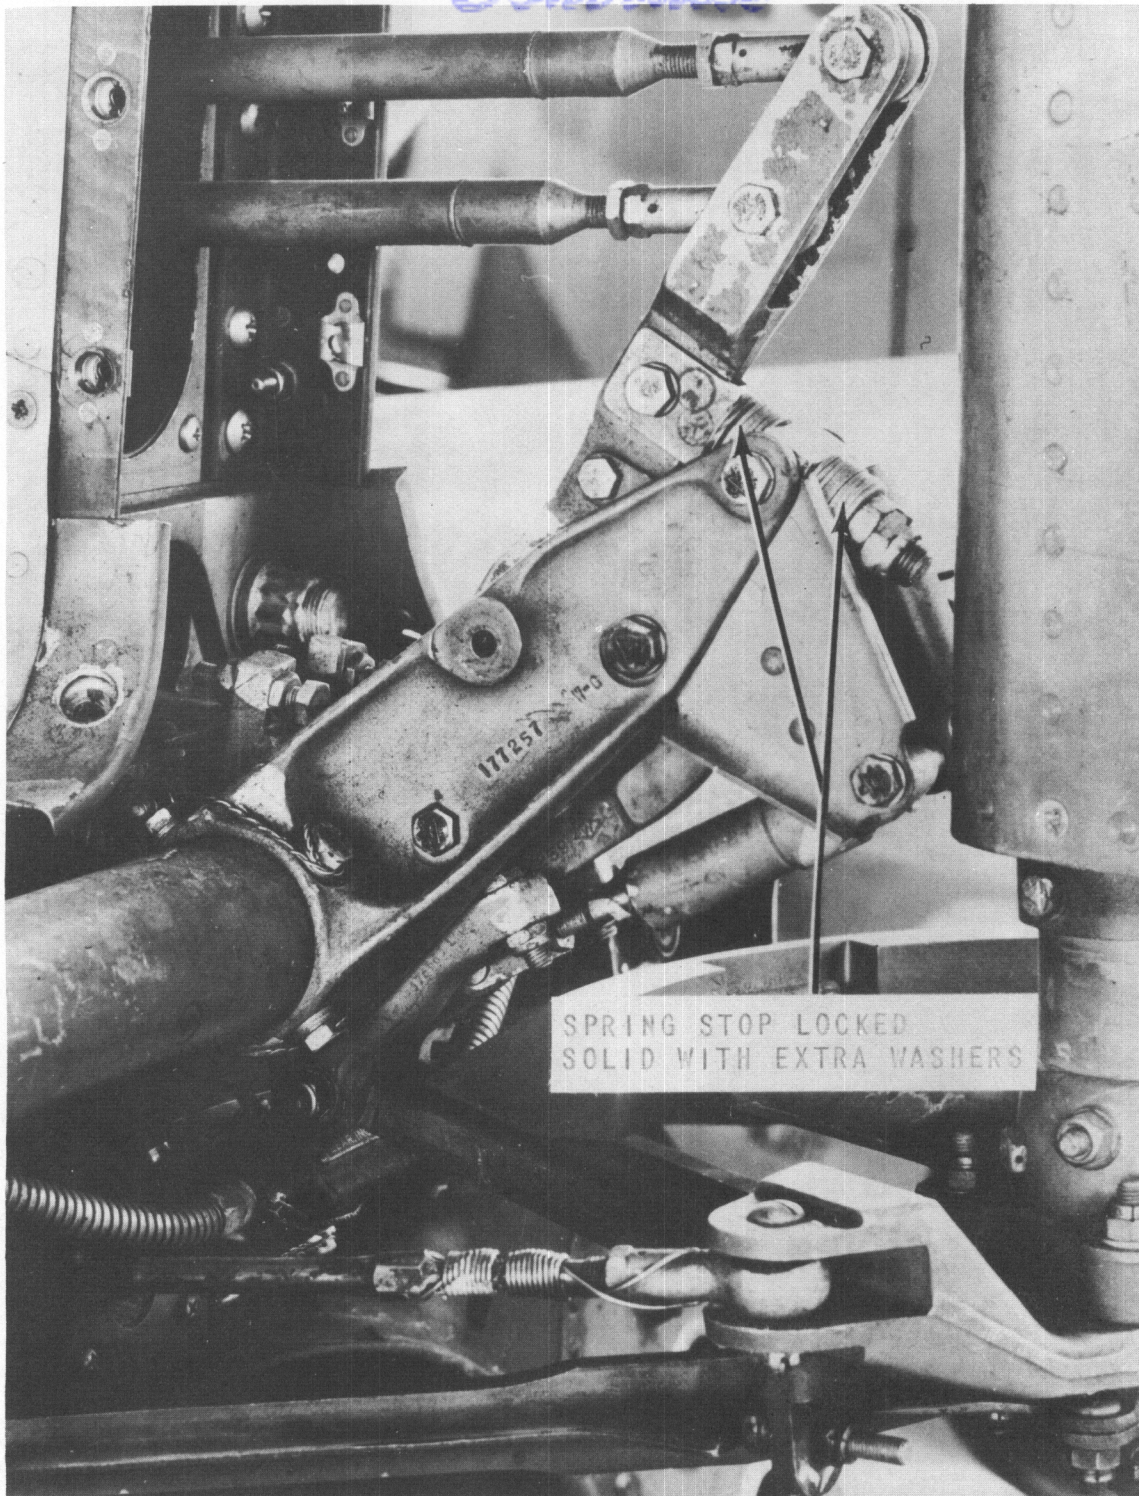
ELEVATOR SPRING TAB MECHANISM LOCKED
